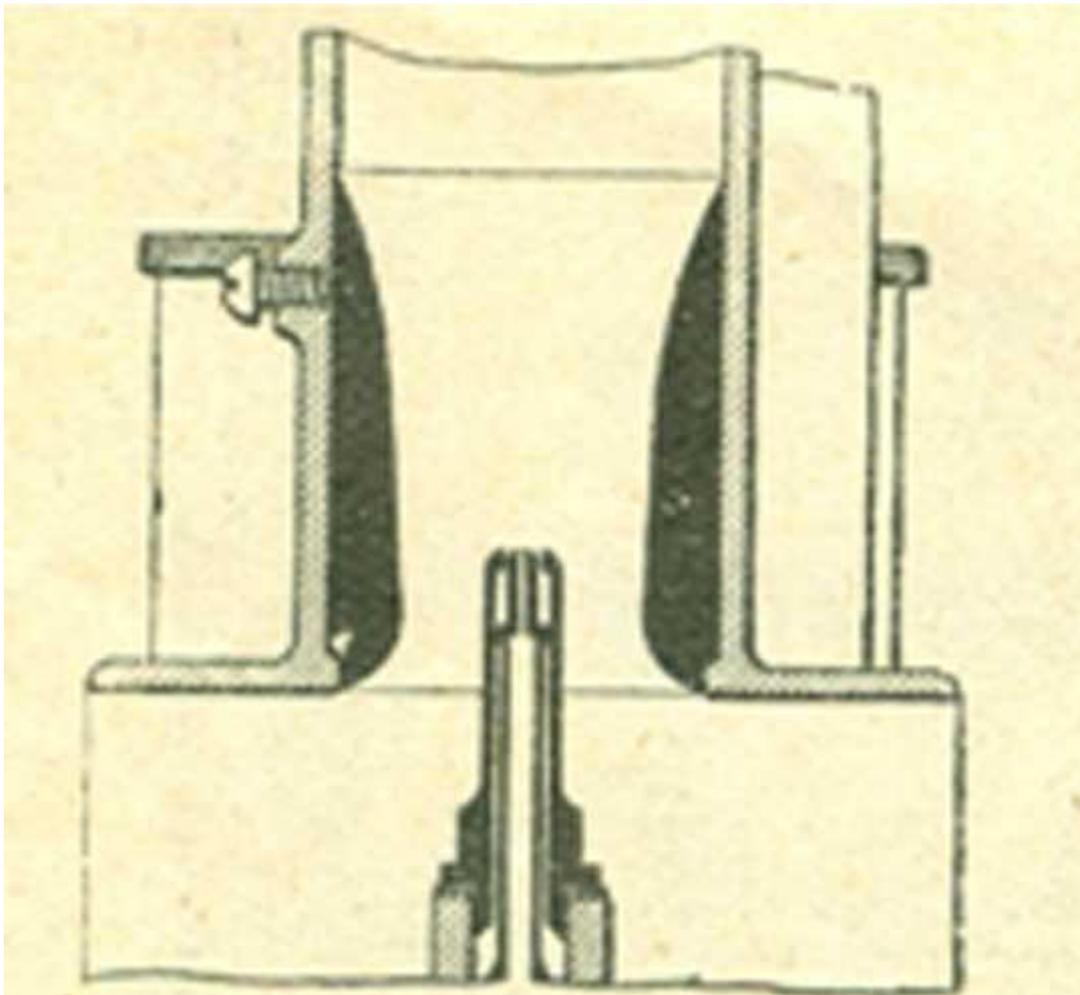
Section showing position of choke tube in vertical Carbureters.
